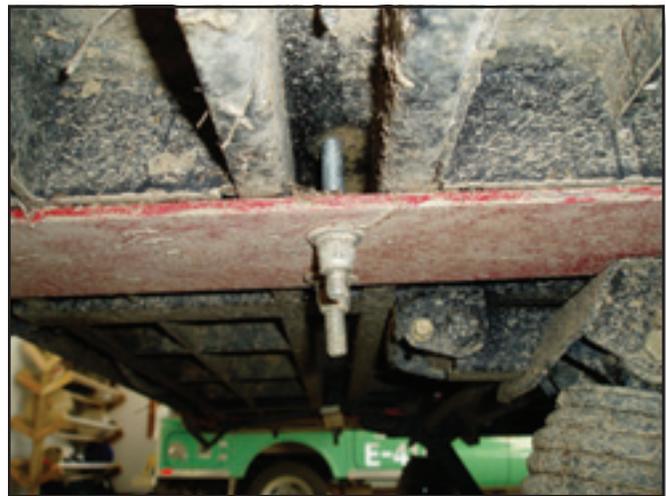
Bolts pass through the bed of the UTV, a crossmember, and one of the pieces of flat steel.
